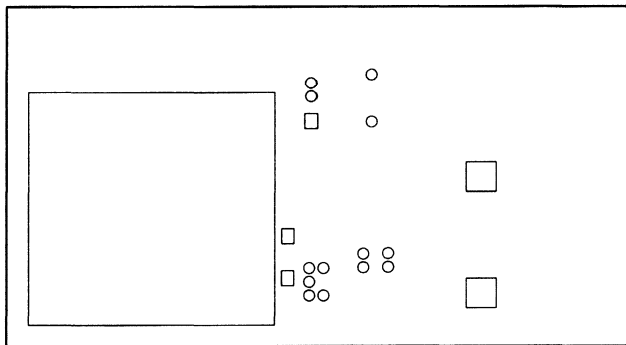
TRF1400 Test Circuit Board Solder Mask — Top Side
